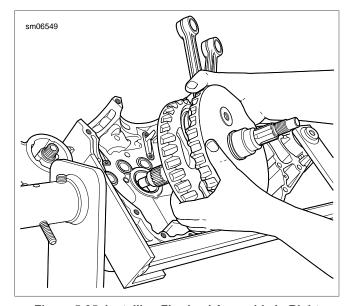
Installing Flywheel Assembly In Right Crankcase
